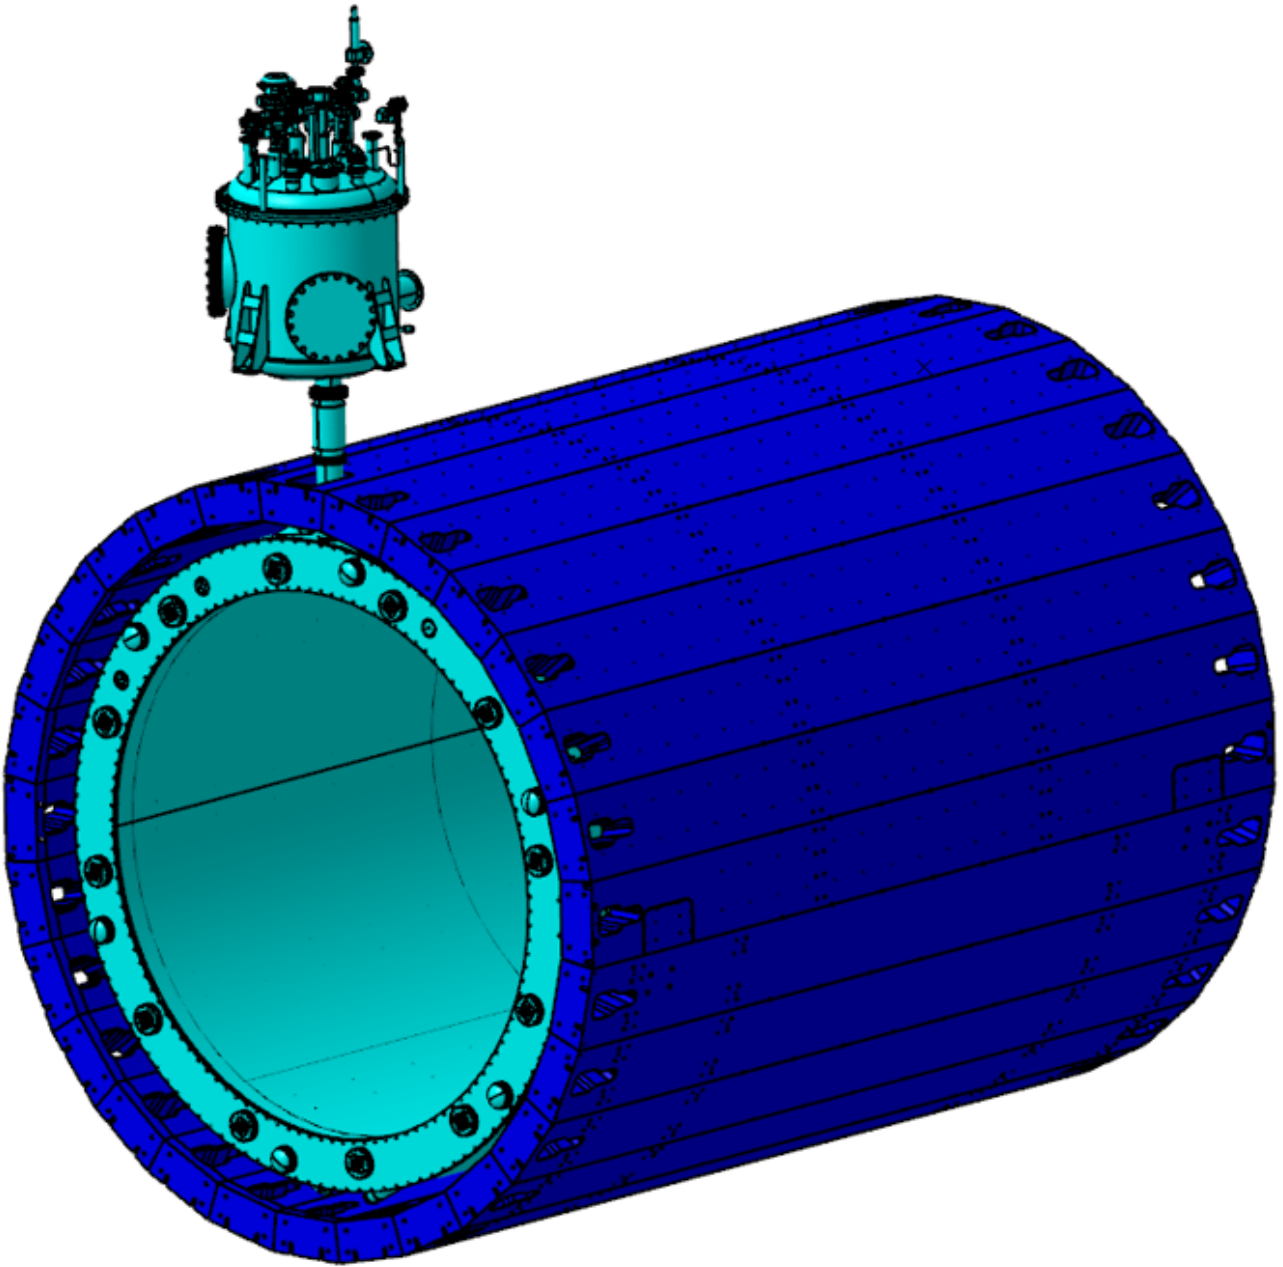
Radial slots in the beams for running cables and tubing
